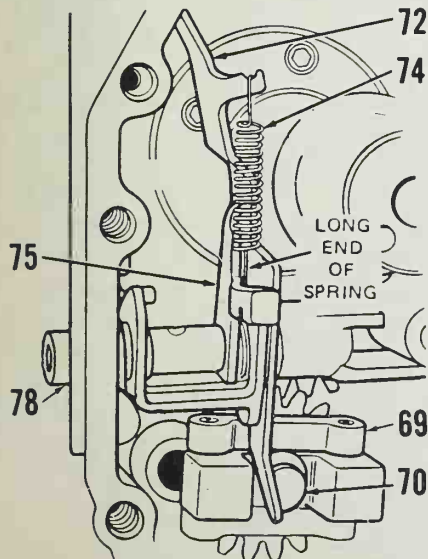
View of governor linkage. Long end of spring (74) attaches to pivot (75).
